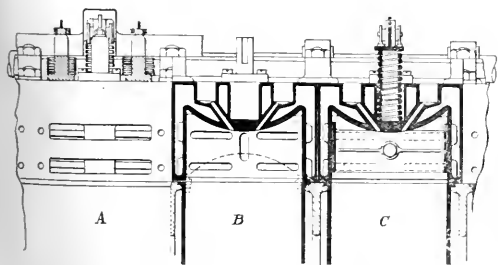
THREE CYLINDERS OF HOWARD ENGINE
